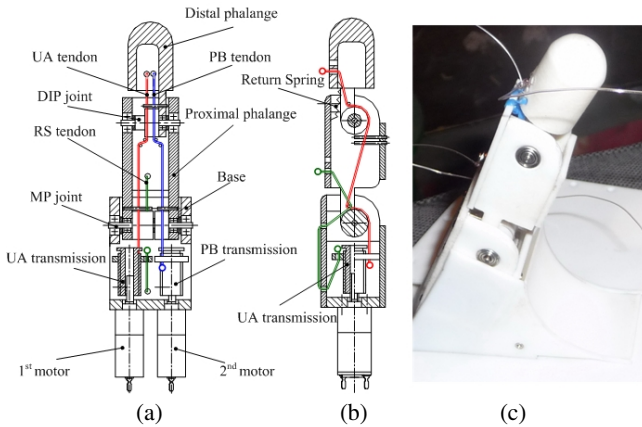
Thumb module. a) Front cutaway view; b) Side cutaway view; c) Thumb module.
